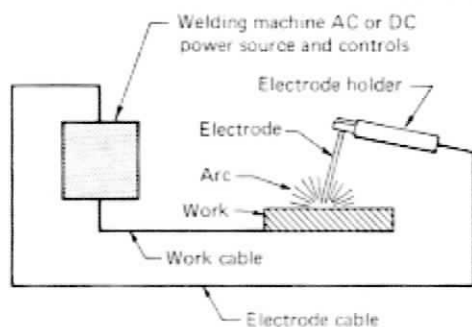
The basic arc-welding circuit (The James Lincoln Arc Welding Foundation, 2000)
